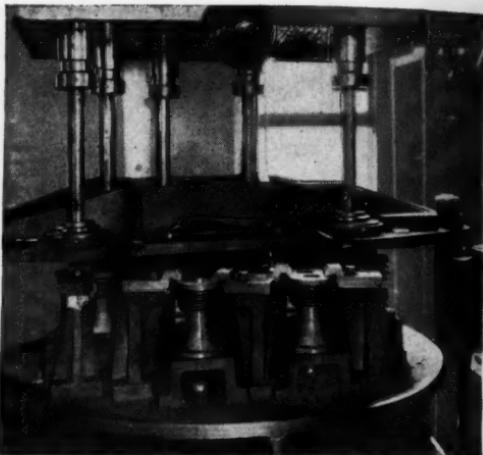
Rough, semi-finish, and finish boring cylinders for a small type of air conditioning unit.
